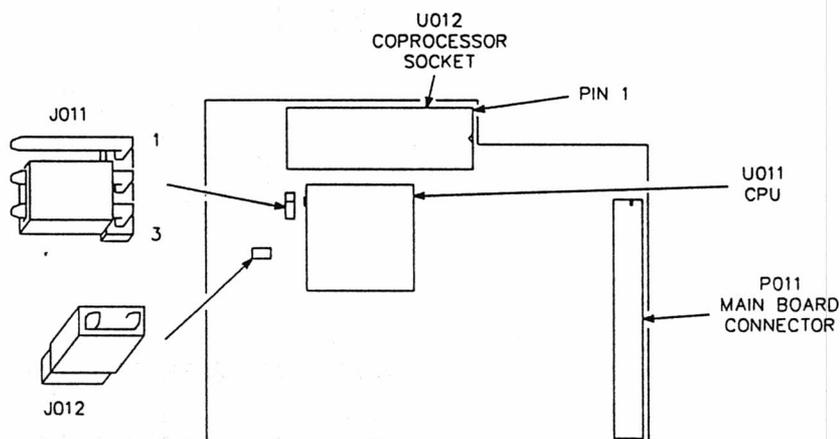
80286 Processor Module Jumper Locations (85-3509)
